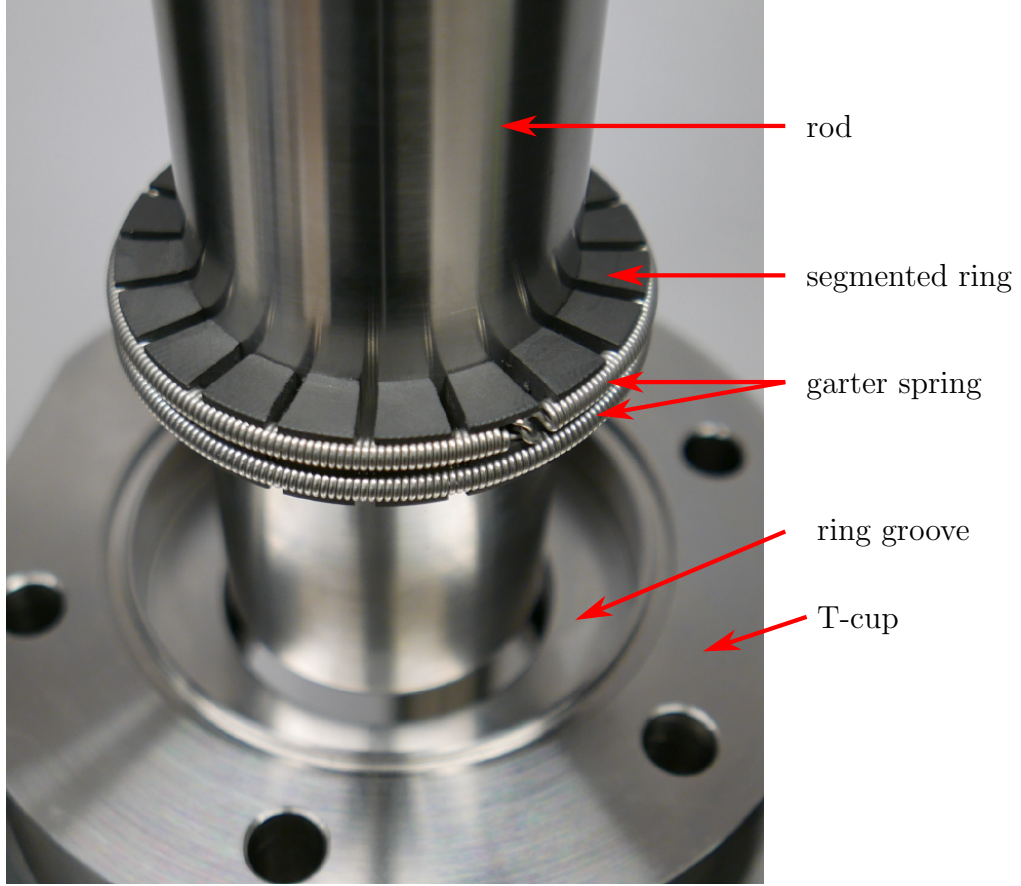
The segmented ring is mounted on a rod, held by two garter springs. In the background the T-cup with the upper ring groove is visible.
